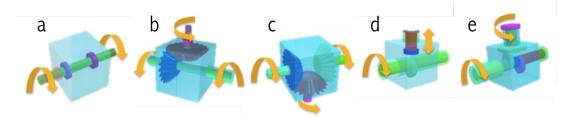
Movements unit embedded into 3D host object and allow it movable. (a)linkage, (b)jumper gear, (c) friction gear, (d)crank, (e)double cam
